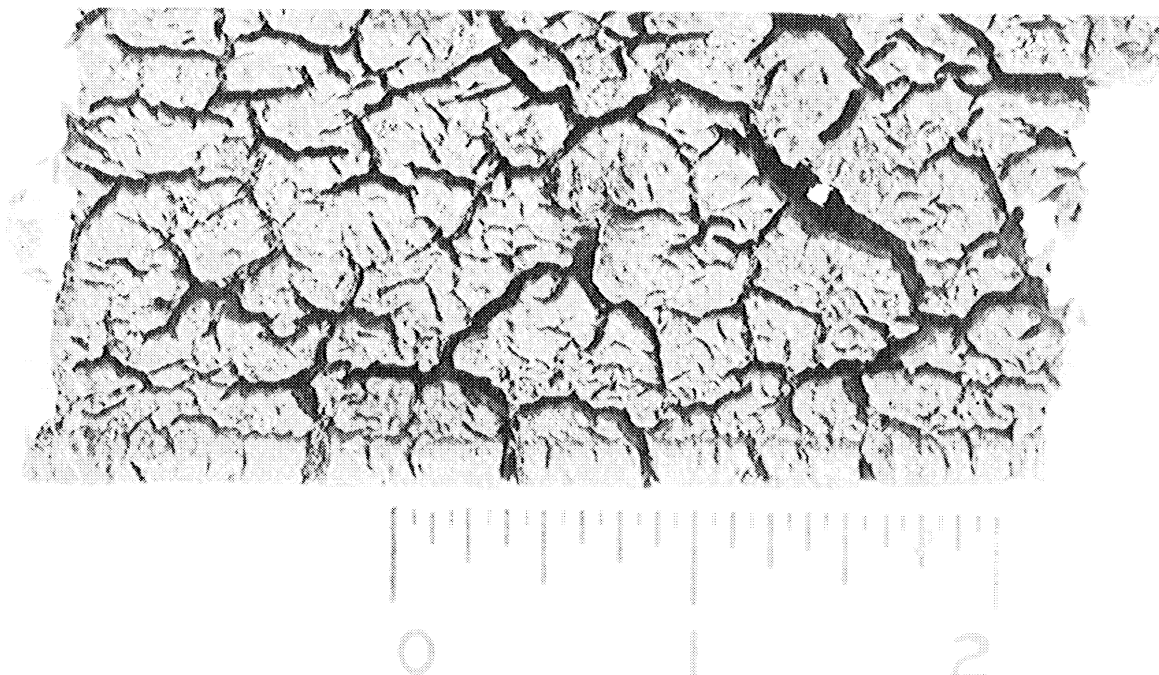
Pronounced thermal fatigue cracks in heat resistant alloy carburizing tray. This is the common failure mechanism of these parts.
